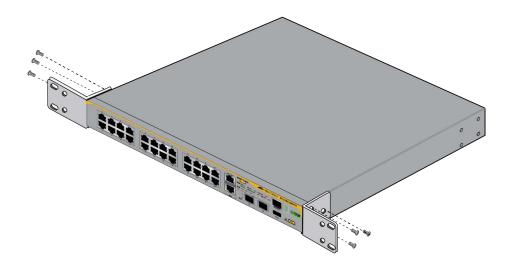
Attaching the Equipment Rack Brackets to the x330-28GTX Switch
